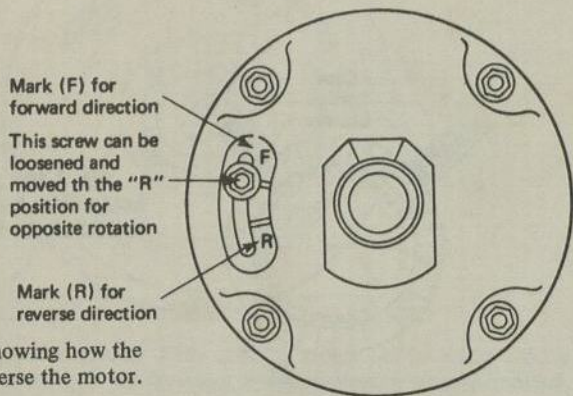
An end plate showing how the brush holder is moved to reverse the motor.
